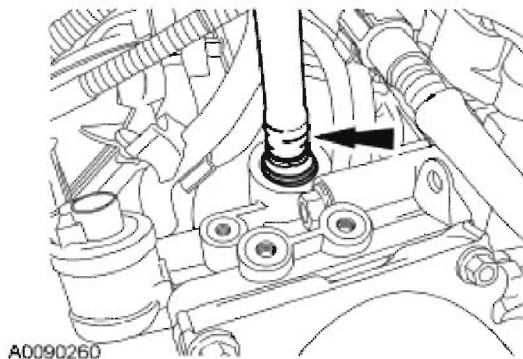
Locating Accelerator Control Cable Bracket Nut (2 Of 2)
